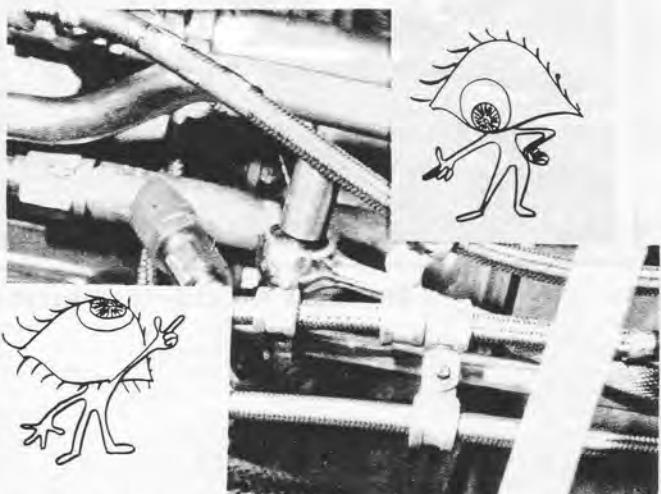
Photo D and our eyeballers show the way to the socket wrench and ratchet.
